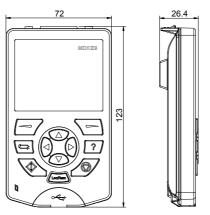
Mounting dimensions of the MDKE9 external operating panel (unit: mm)
